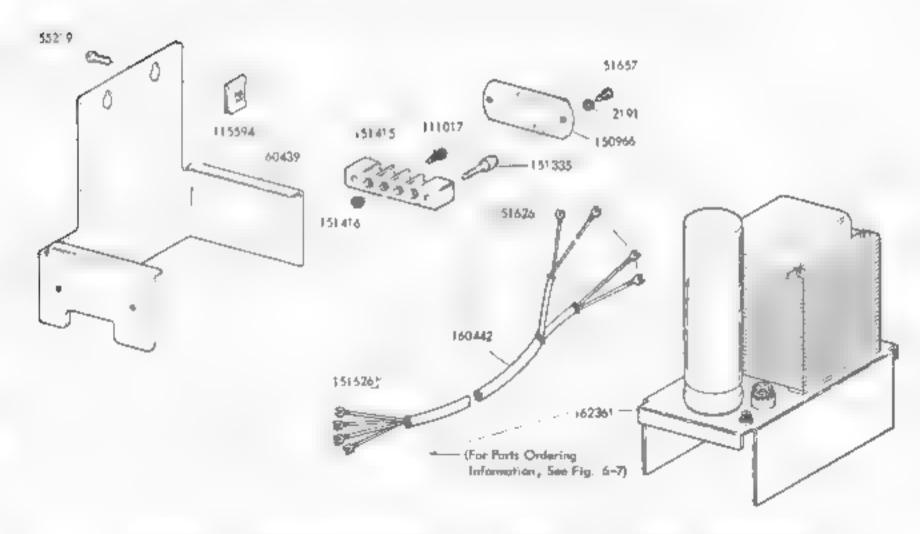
160422 MODIFICATION KIT TO EQUIP LAAC CABINET WITH RECTIFIER
